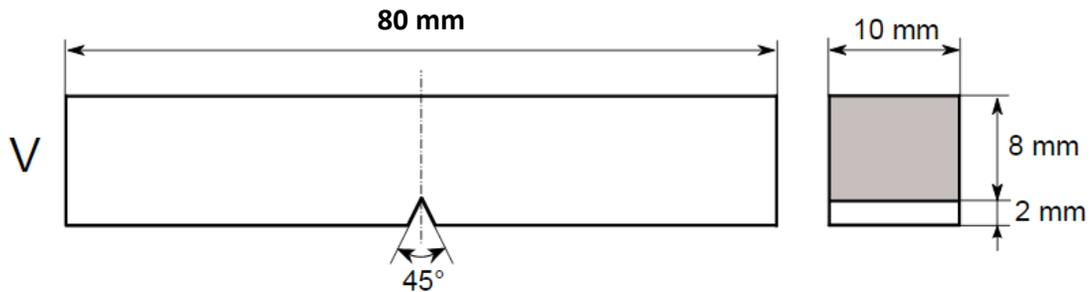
Standard Charpy impact test specimens' dimensions (ASTM E23)
